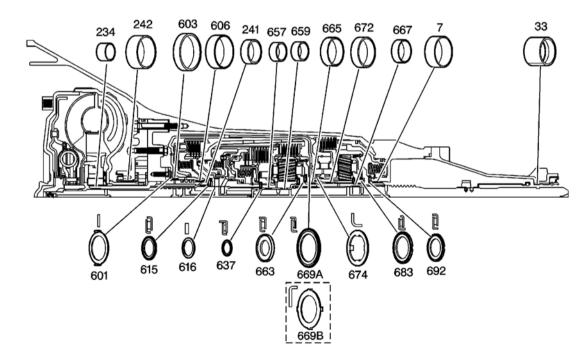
Exploded View Of Bearings And Bushings Courtesy of GENERAL MOTORS CORP.
